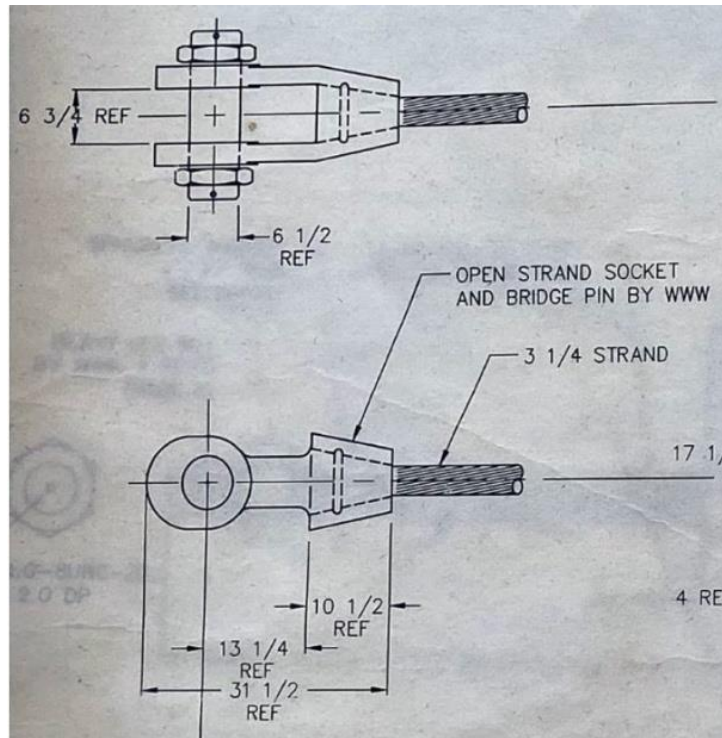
WWW Shop Drawing for Open Strand Socket
